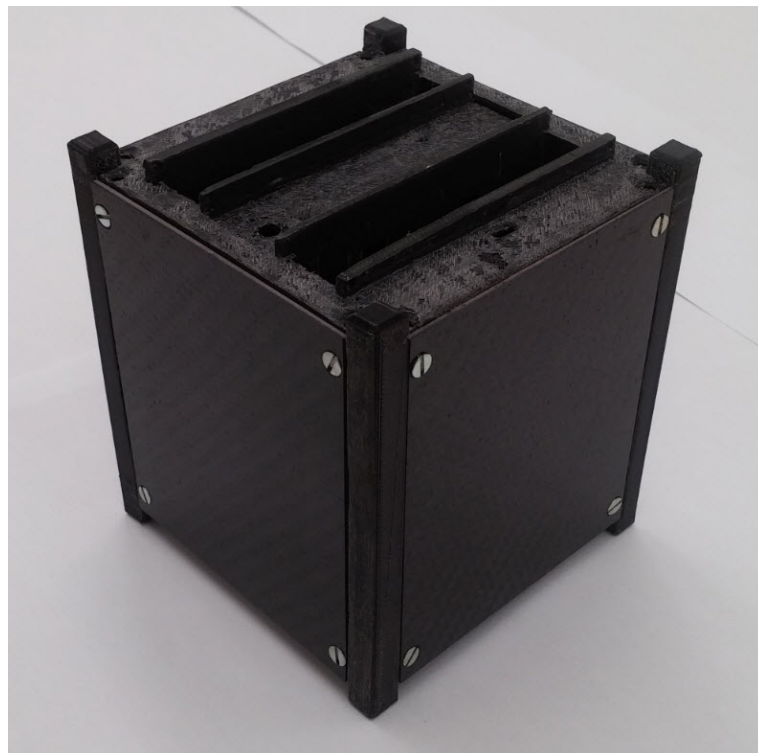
Completely assembled mock-up structure with the 3D printed ADS module in place.
